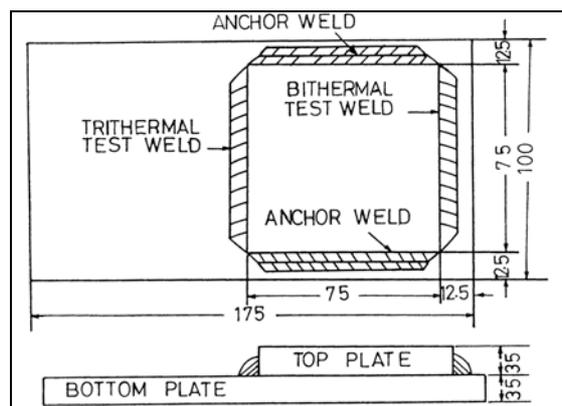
Scheme of the dimensions and configuration of the CTS cracking test. Test method is presented in Appendix 1.
